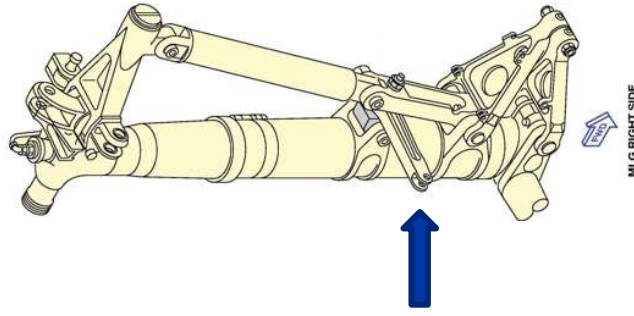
Universal Side Strut Fitting relative to R/H MLG-
